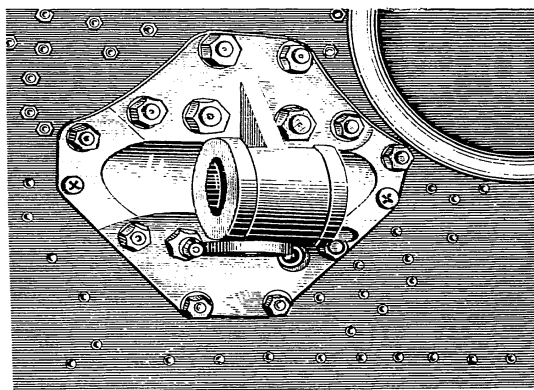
L.G. BRACE STRUT ATTACHMENT UNIT ON FRAME NO.22.
